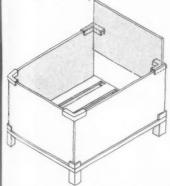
Detachable sided pallet, can be made in timber or steel.
